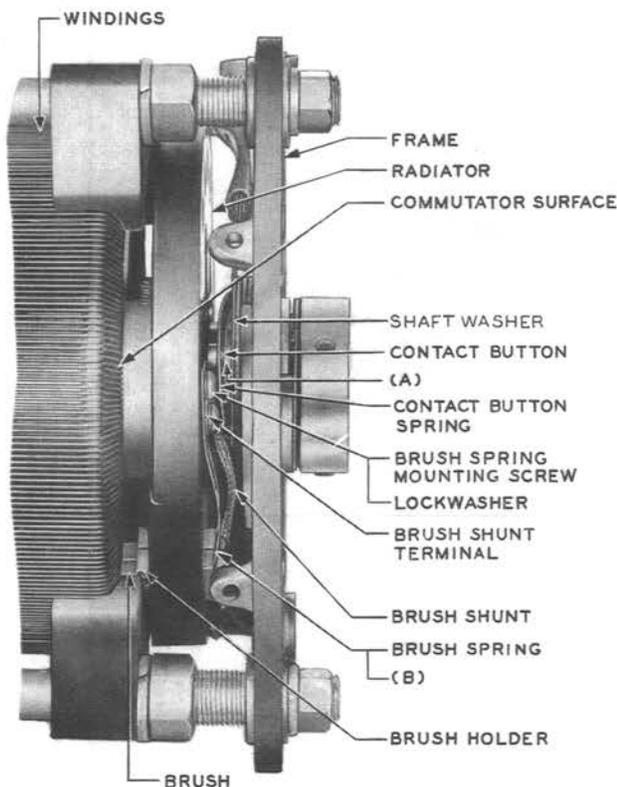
KS-15646 Autotransformer — Cover Removed
